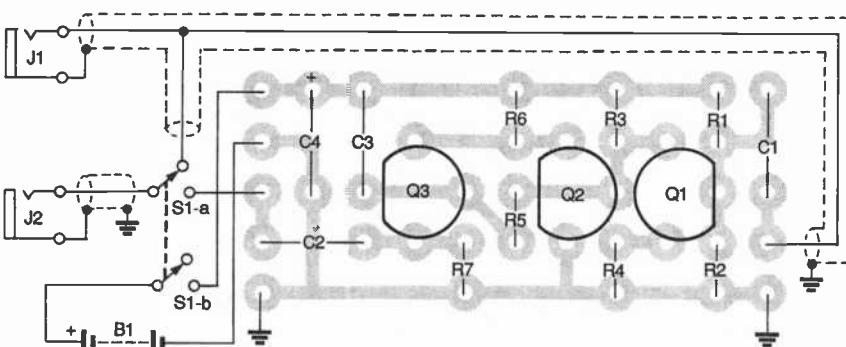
Off-board wiring could get tricky, unless you follow this parts-placement diagram.
